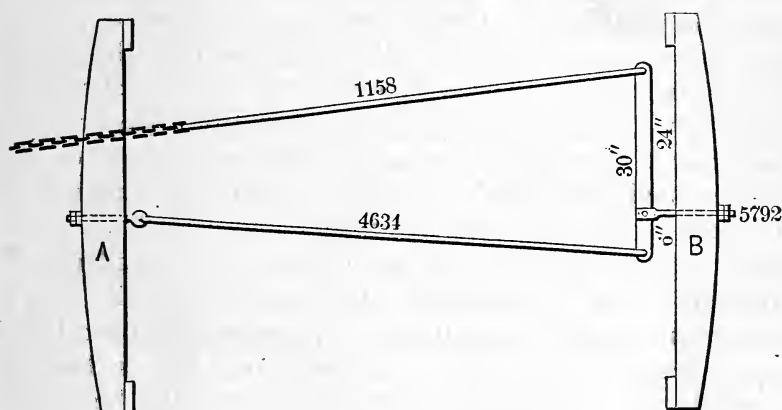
SKETCH OF MECHANISM OF HAND-BRAKE.
